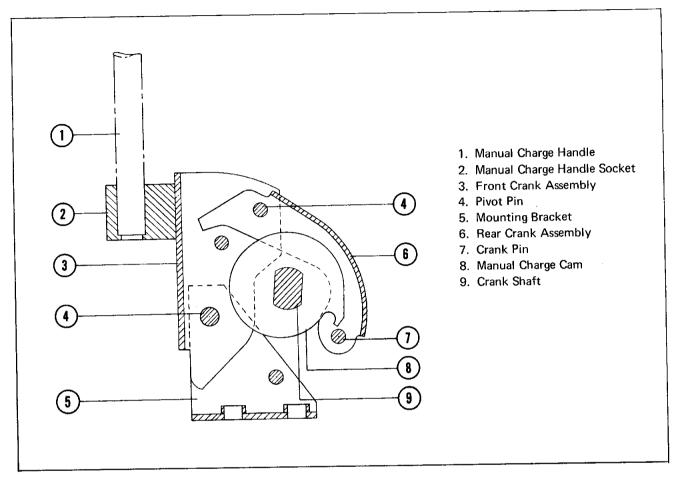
Spring-Charging Mechanism on Manual Operated Breakers
